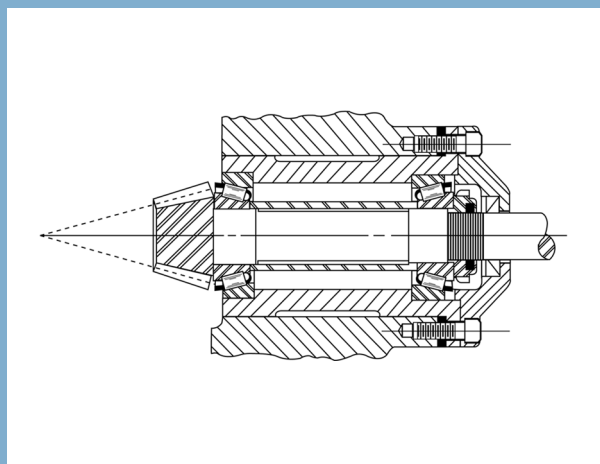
This mounting is another form of bearing arrangement for overhung pinions.
